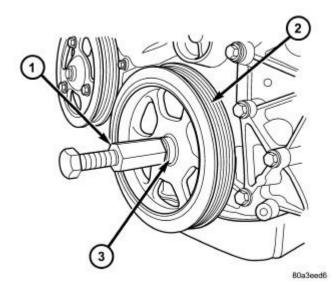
CRANKSHAFT DAMPER Courtesy of CHRYSLER LLC
